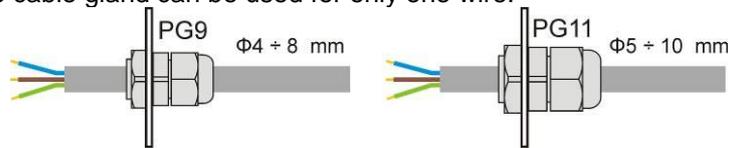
Recommended types and sections of installation cables PG9 and PG11 for cable glands.
